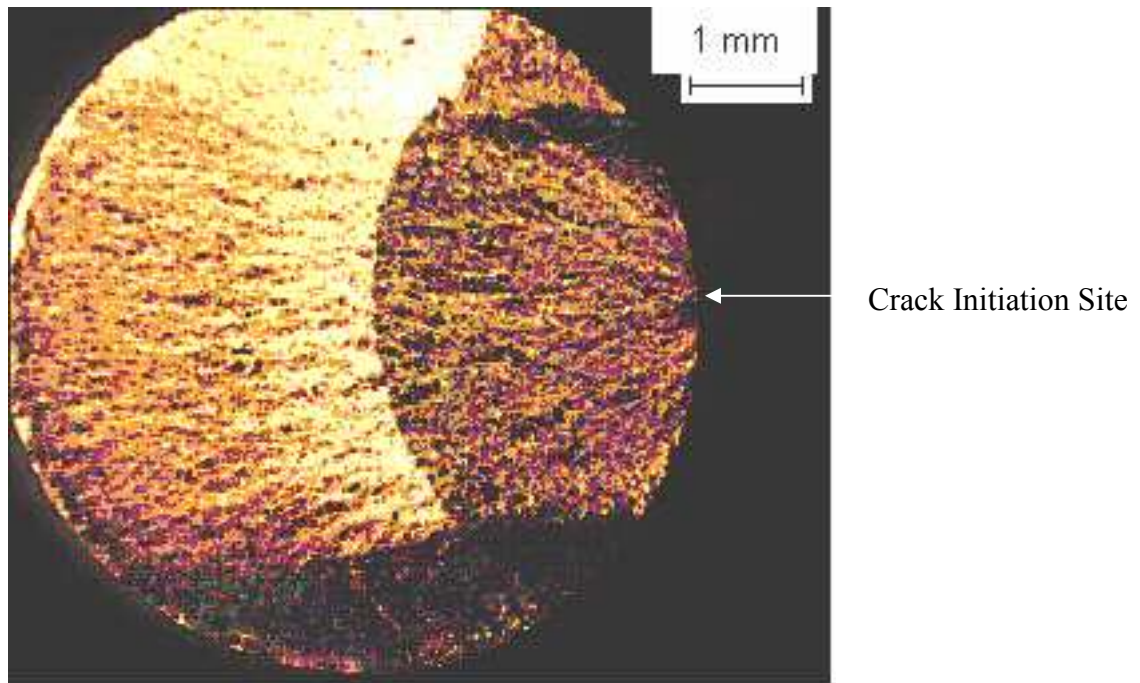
Low magnification stereoscope image of the fracture surface of specimen ND-1 tested at  $\Delta\epsilon=0.66\%$  and  $650^{\circ}\text{C}$ .
